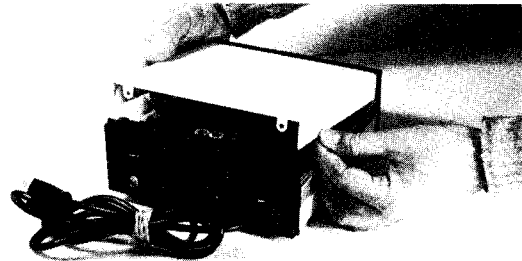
Top Cover – Mounting Tabs Removed from Rear Bezel
